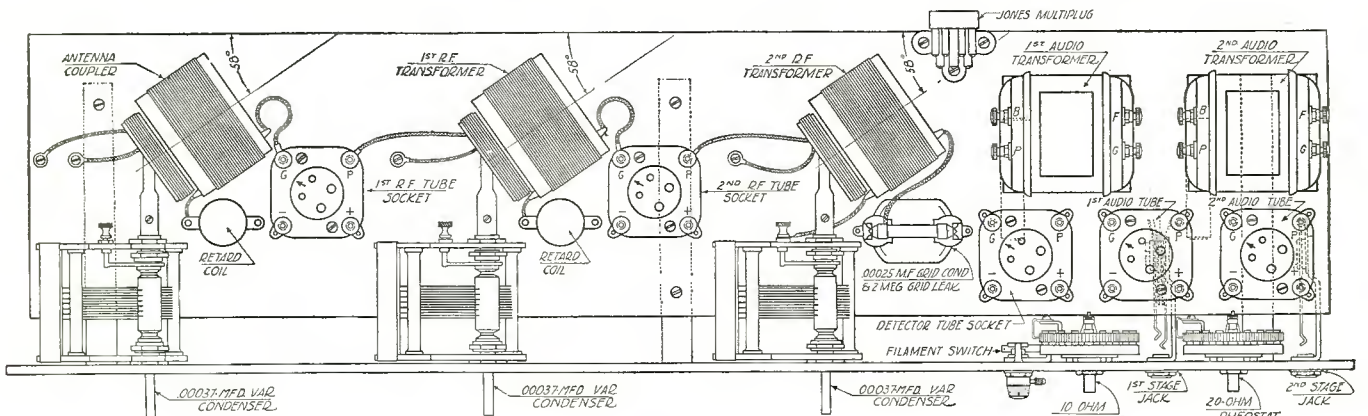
Top view of receiver. Parts shown with dotted lines are mounted on bottom side of subpanel
